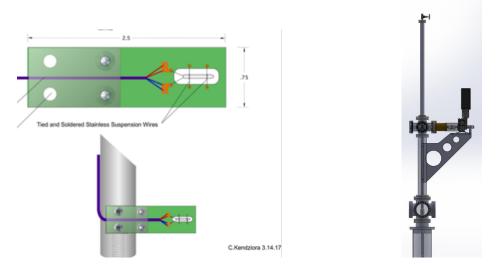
Left: Sensor mounted on a PCB board, and PCB board mounted on the rod. Right: The driving mechanism of the dynamic T-gradient monitor consisting of a stepper motor driving the pinion and gear linear motion mechanism.
